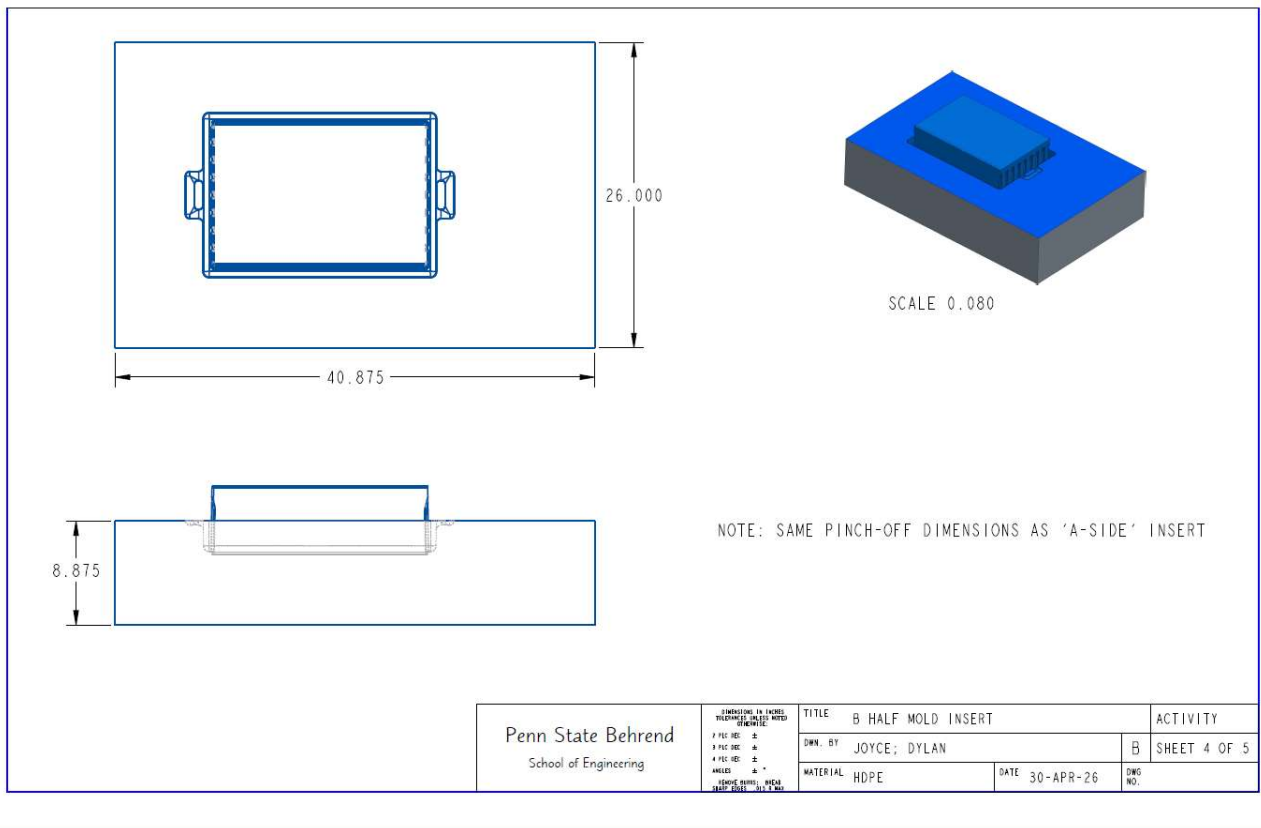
Dimensioned Drawing of B-Side of Mold Insert
